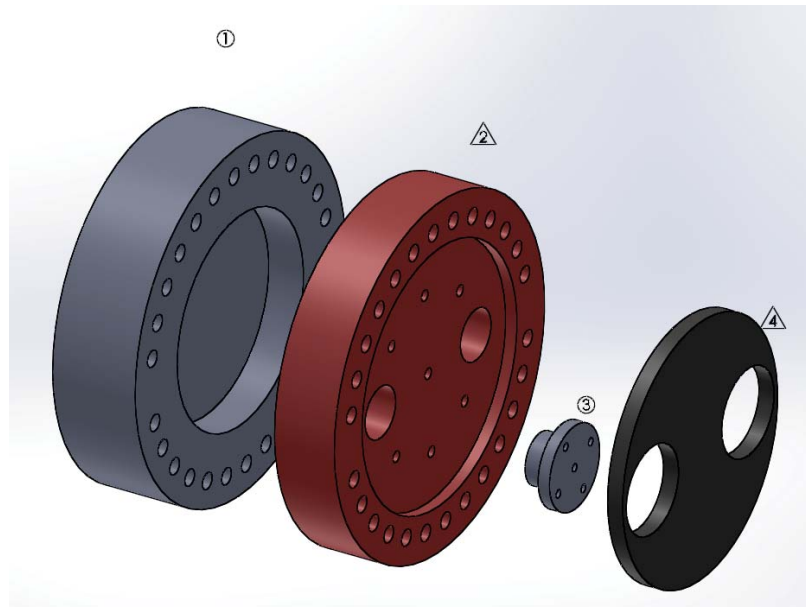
Wear plate and Pre-chamber exploded drawing
